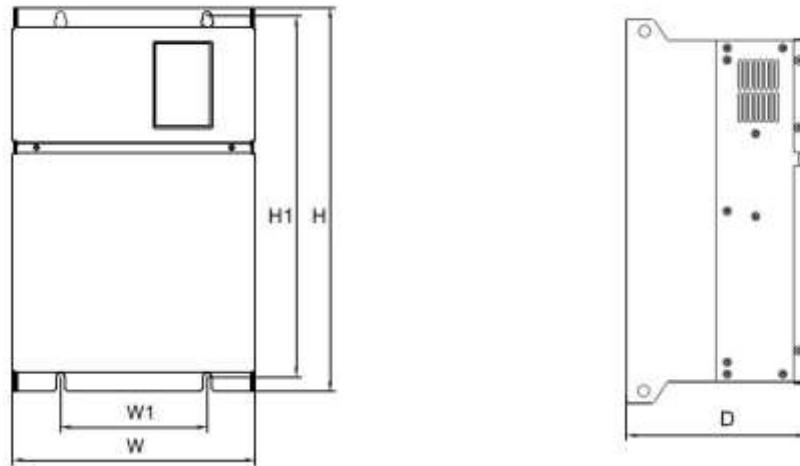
External and mounting dimensions (three-phase 355kW to800kW)
